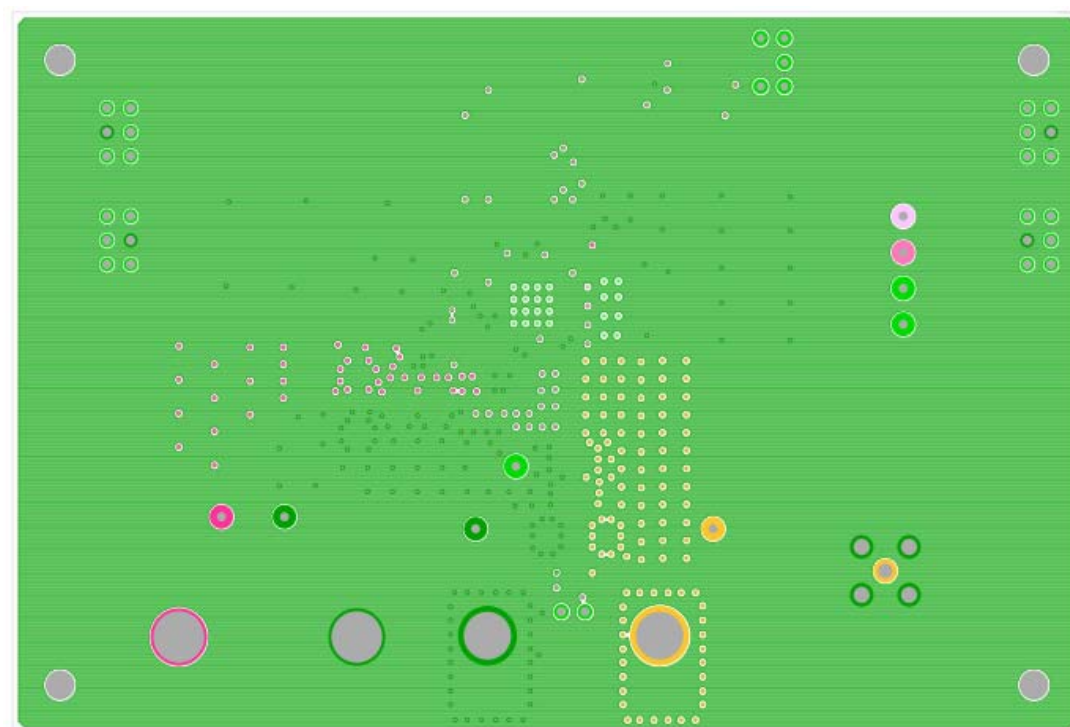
PCB - Inner Layer - Layer 2 (Top View)
